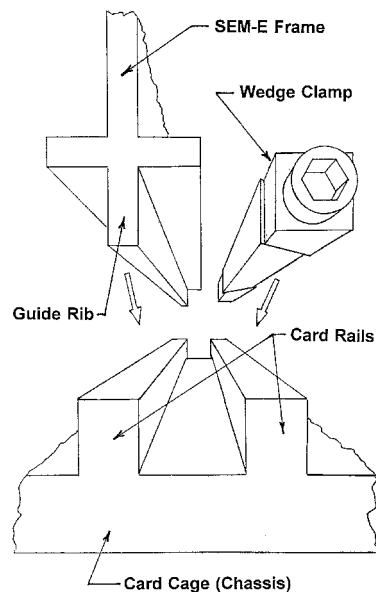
Junction between SEM-E frame guide rib and chassis card rail, showing a wedge clamp.
